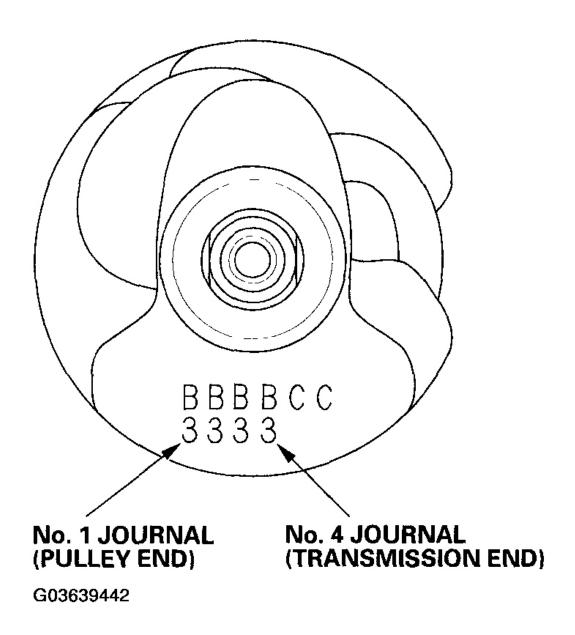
Locating And Identifying Crankshaft Bore Code (2 Of 2) Courtesy of AMERICAN HONDA MOTOR CO., INC.
